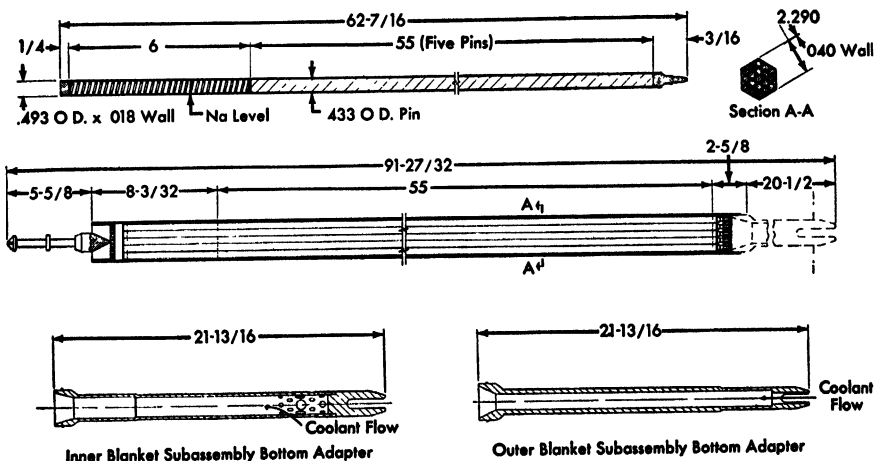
EBR-II inner and outer blanket subassemblies.
